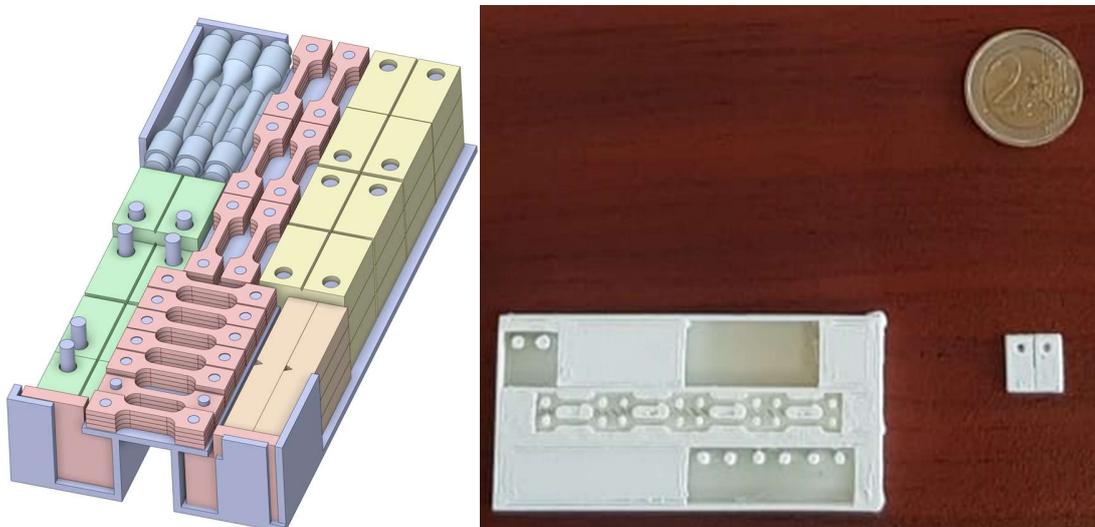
CAD design of the capsule containing the material samples (left) and 3D printed mockup (right)
